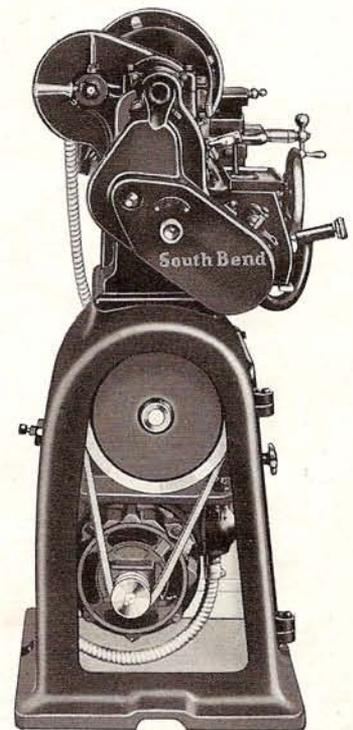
End View of Lathe with End Plate Removed to show Multiple "V" Belt Drive from Motor to Cone Pulley Shaft.
